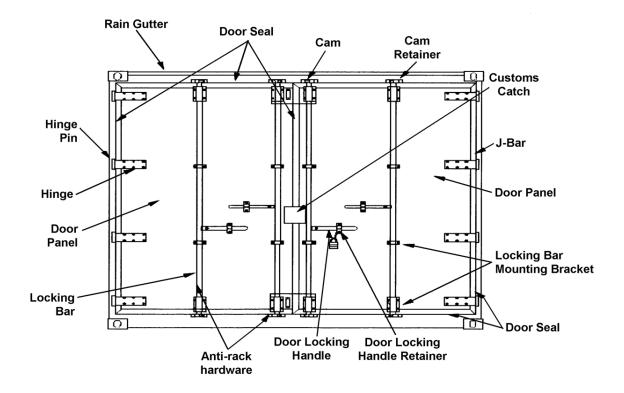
Rear End Door Assembly with Customs Catch Plate
